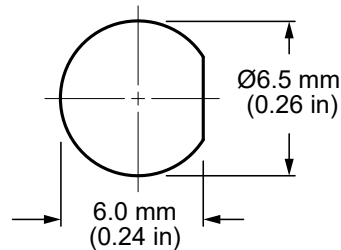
Recommended Mounting Hole Dimensions for the CSI-SGFI-150-UFFR Cable Assembly
